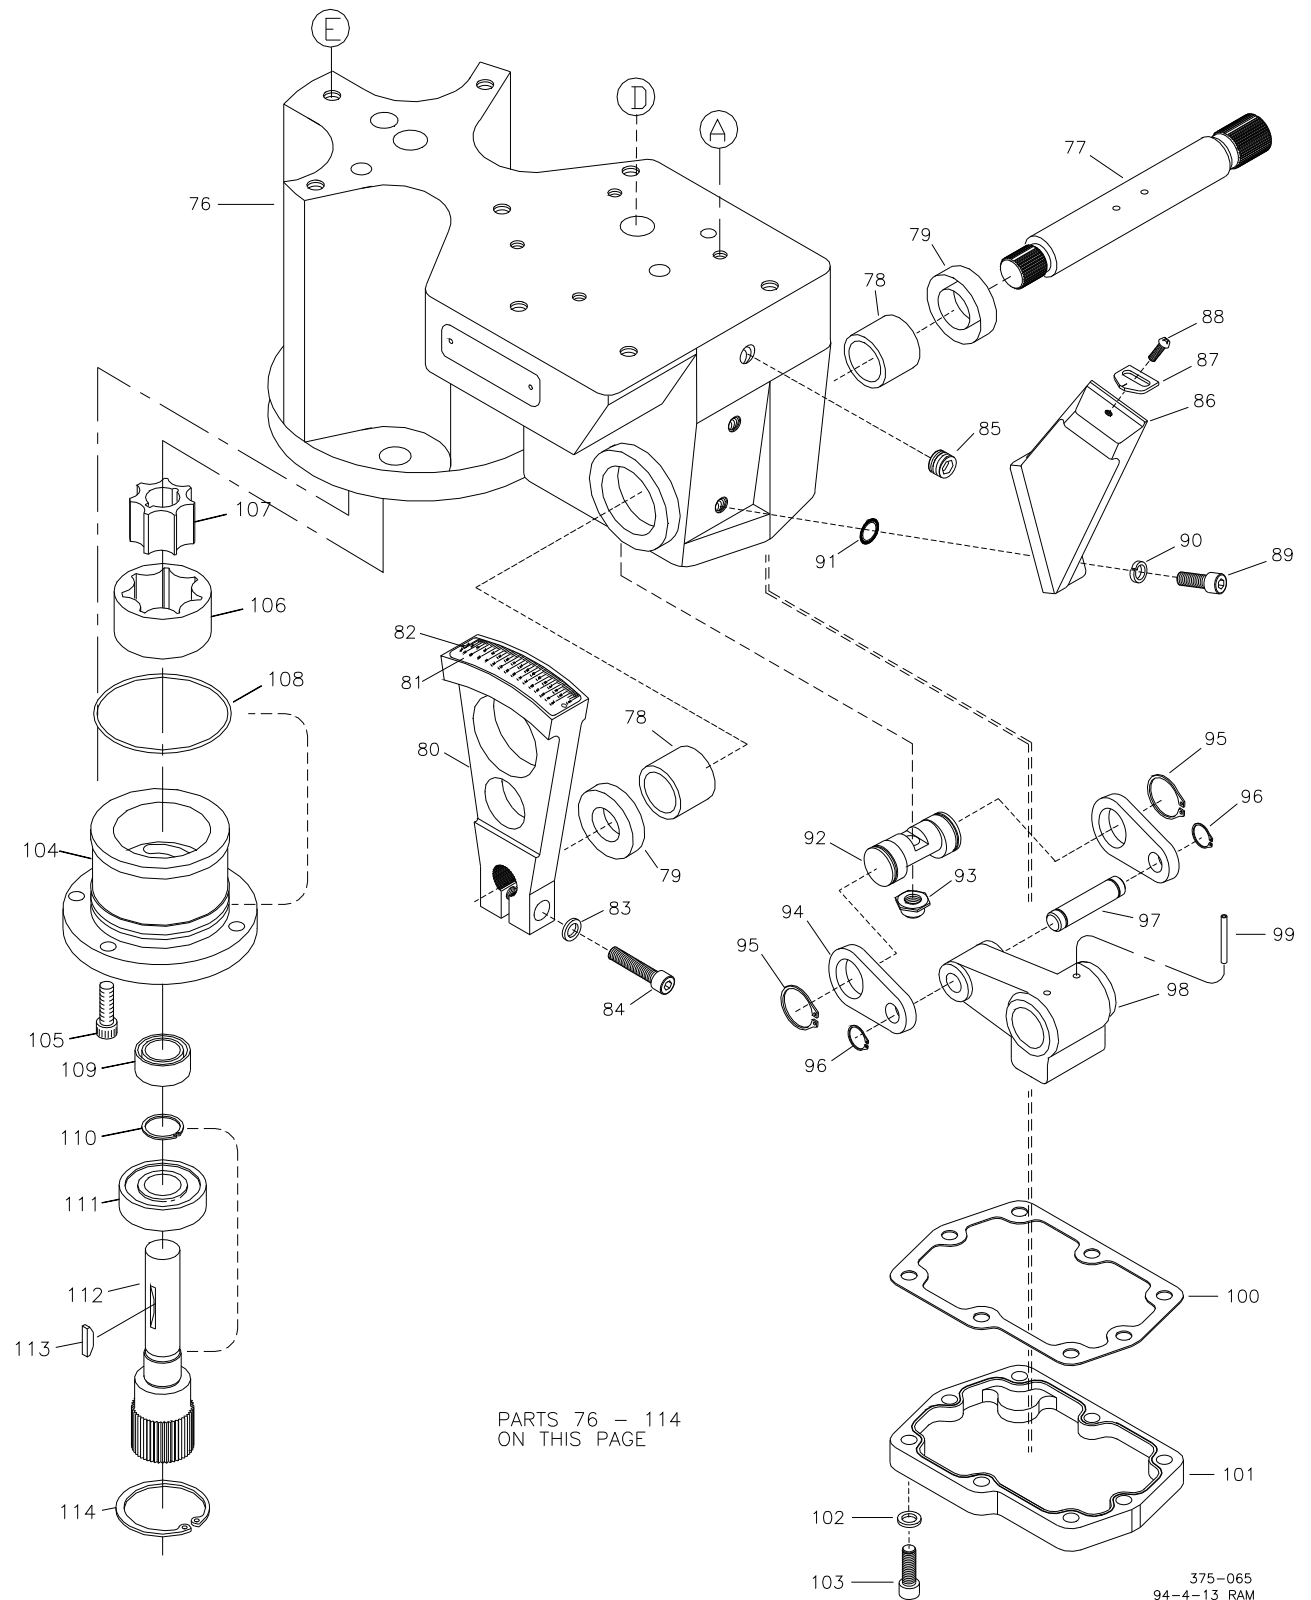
Exploded View of PG Actuator Lower Assembly (rotary output)
